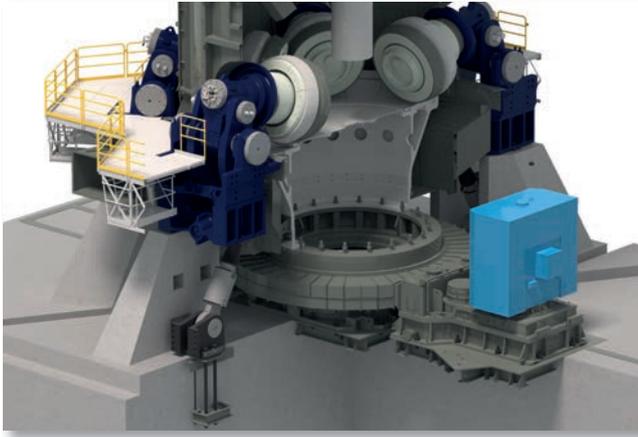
MAX Drive installed under an OK Mill for cement grinding
